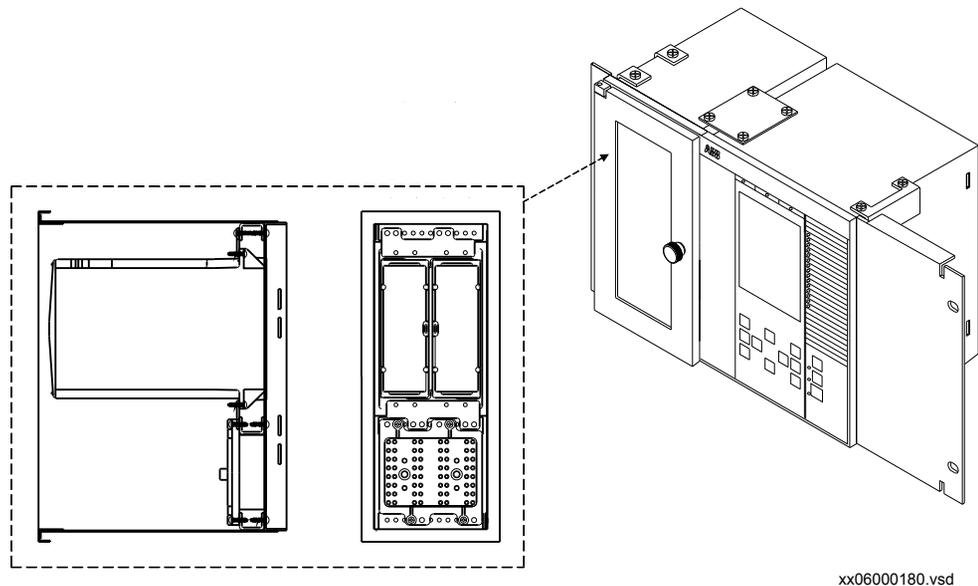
IED in the 670 series (1/2 x 19") mounted with a RHGS6 case containing a test switch module equipped with only a test switch and a RX2 terminal base
